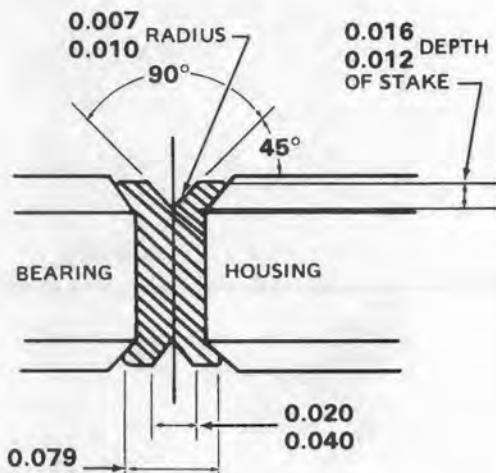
Bearing replacement (Sheet 6 of 7)
